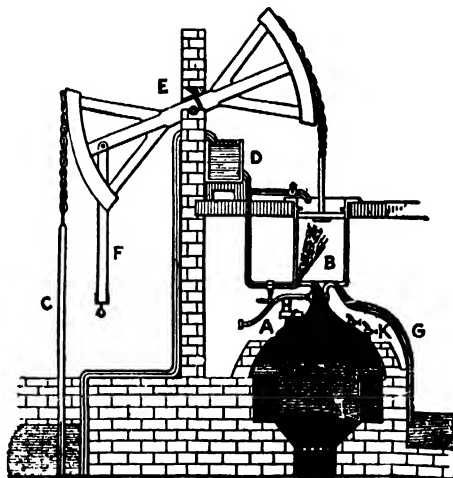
Newcomen's steam engine, cross section. (Courtesy of John M. Wiley Company.)
